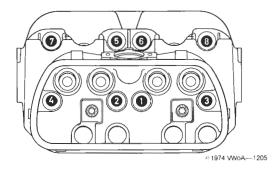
Single-carburetor engine initial tightening sequence.
